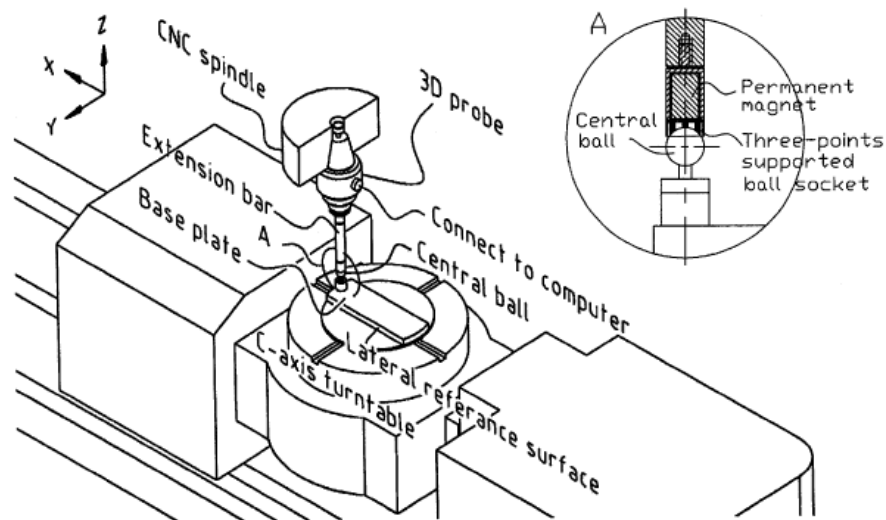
3D probe-ball for five-axis machine tool's accuracy test
